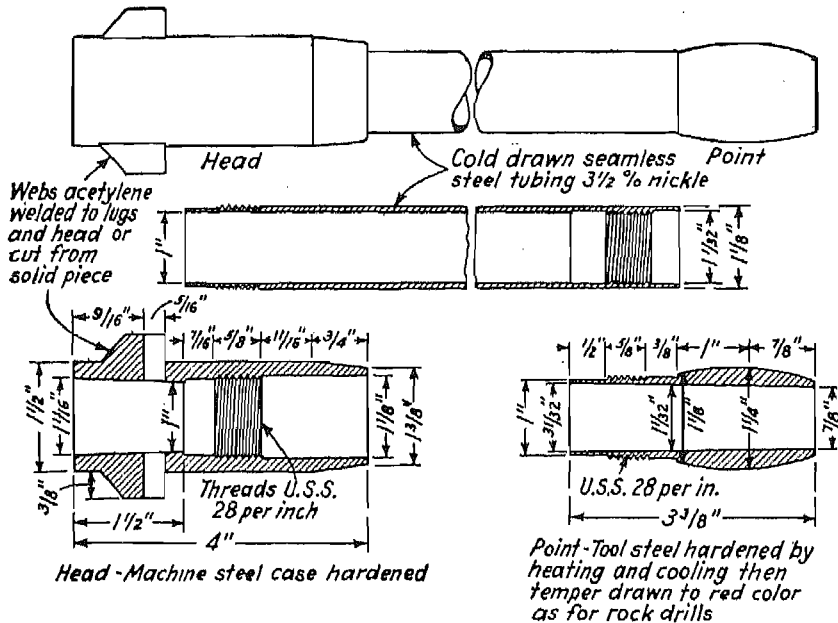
Details of soil-sampling tube. (Williams and Wilkins Company, *Soil Sci.*, Vol. 27, No. 2.)
